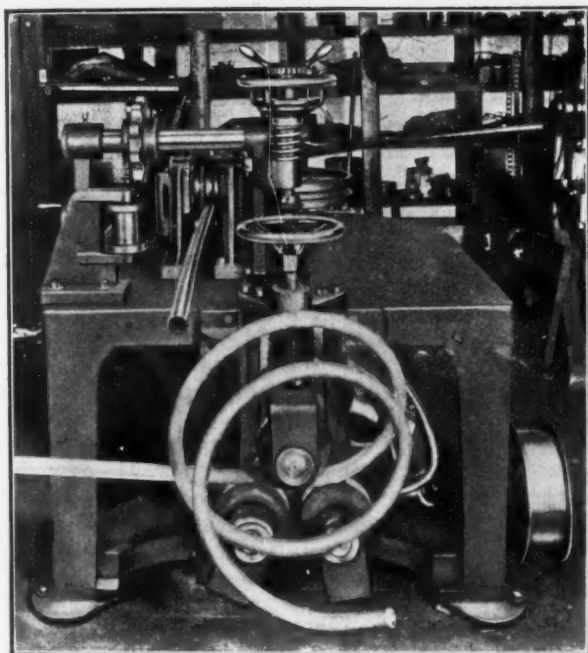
A Machine for Making Conical Helices and Also Radial Bends.
